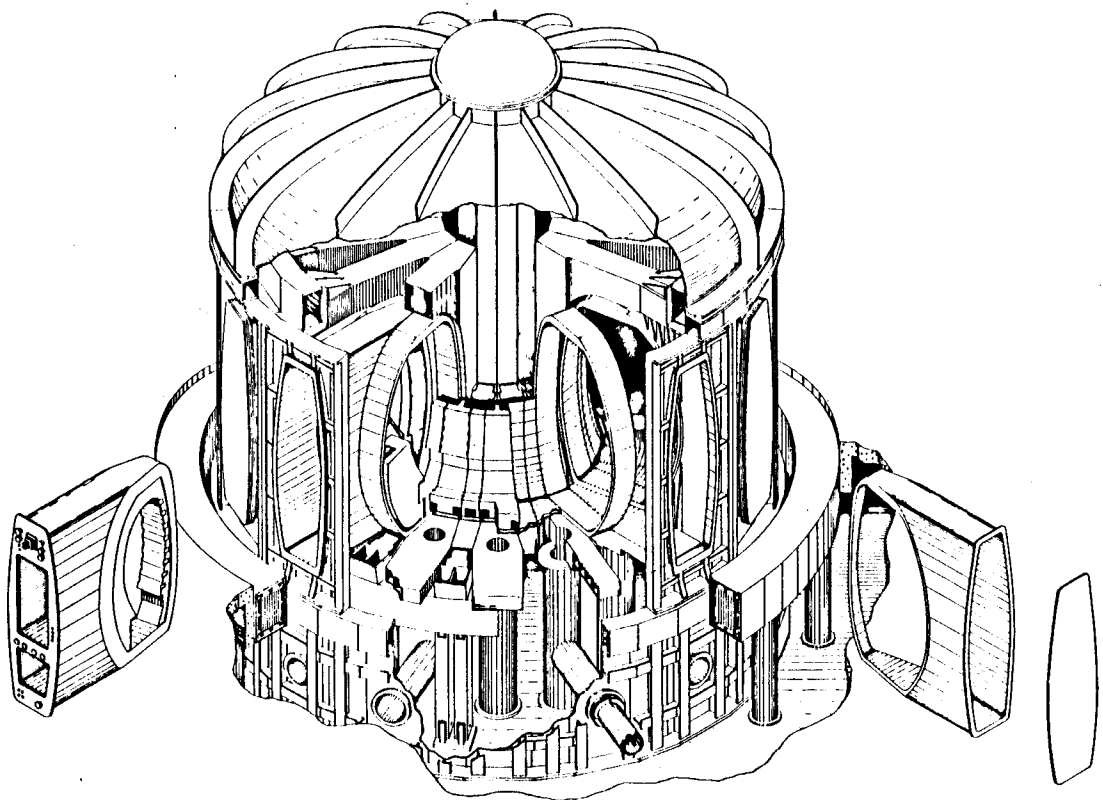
Isometric view of DCT-8, showing the vacuum module removal.
